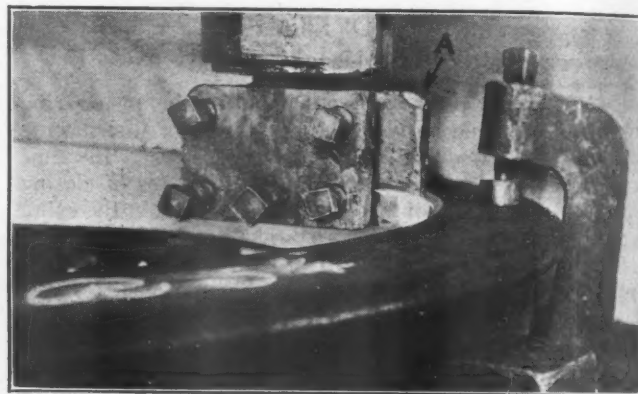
Additional Support Provided for Back of Boring Mill Tool
